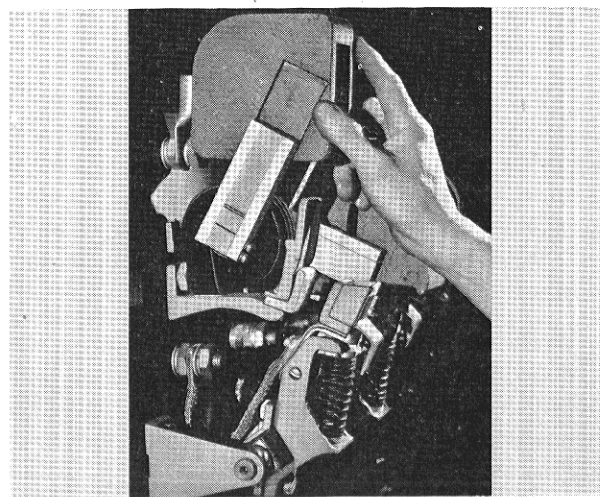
View of a Type 62-F-5 Contactor with the Arc Shield Partially Removed
